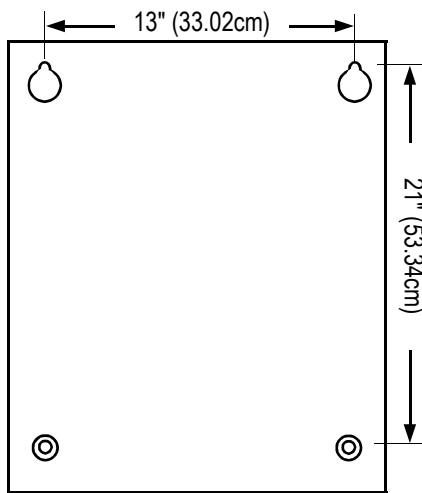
Accelaterm Cabinet Mounting Hole Dimensions
